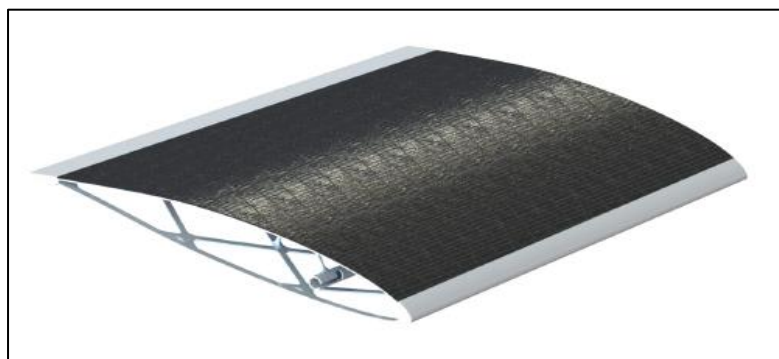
Carbon-fibre veneer adhered to frame module, making up the wing surface [19].
